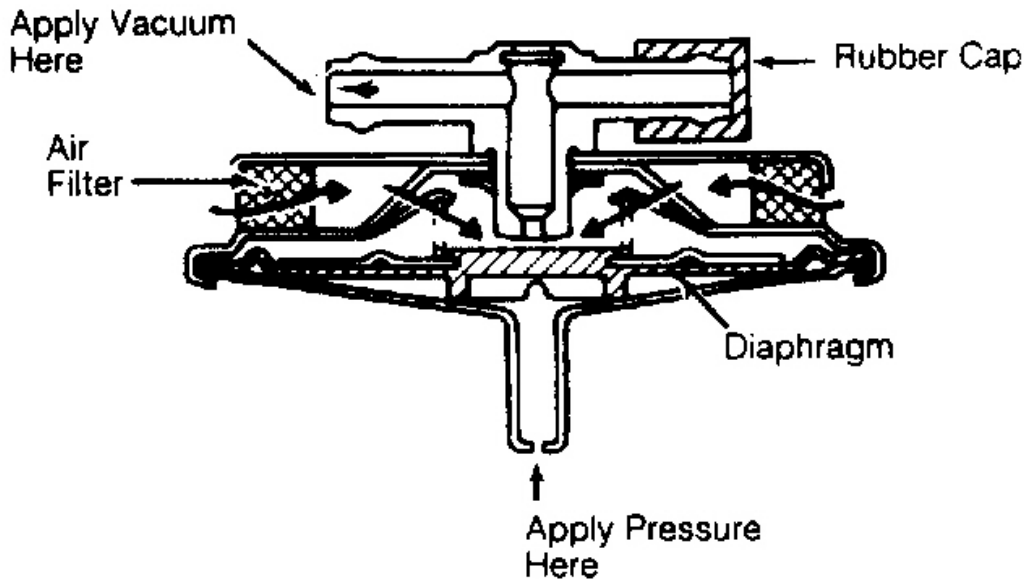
Cross-Section View Of EGR Backpressure Transducer (EGR-BPT)
